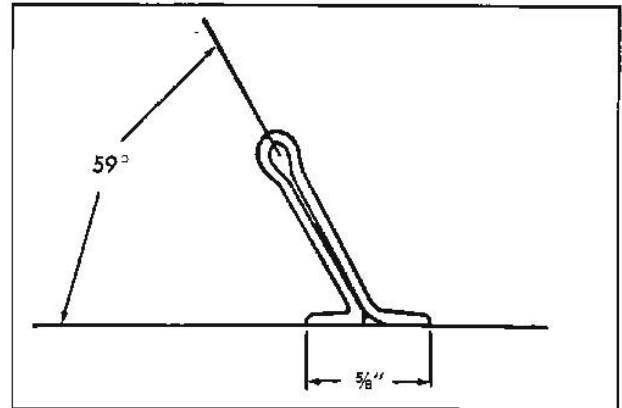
Tool for Removing Upper Half of Main Bearing
